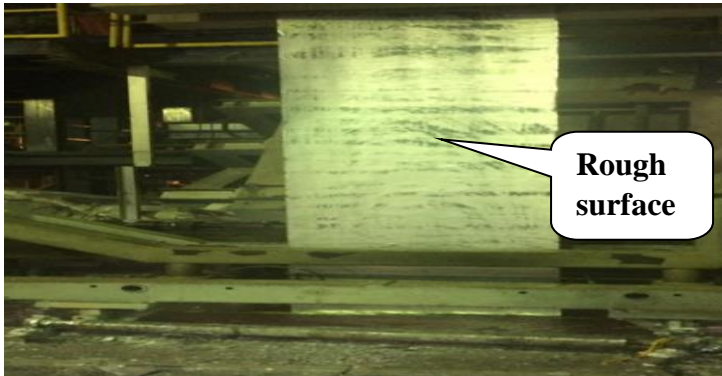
Rough surface conditions on the sheet (on site pictures)
